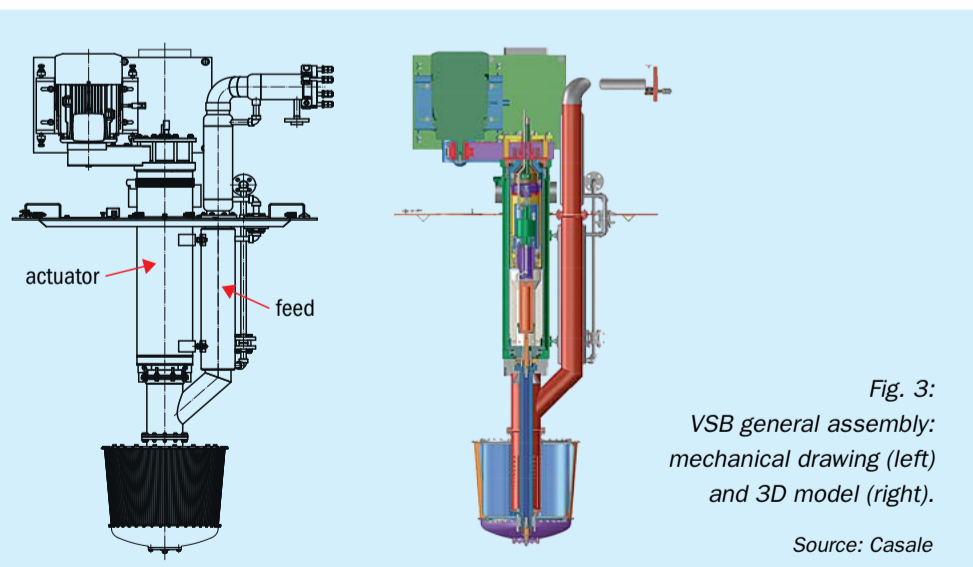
VSB general assembly: mechanical drawing (left) and 3D model (right).
